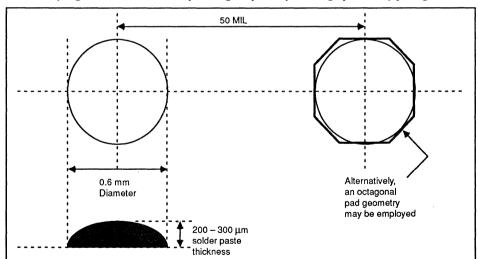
Solder Pad Design for Surface Mount Pin Grid Arrays
